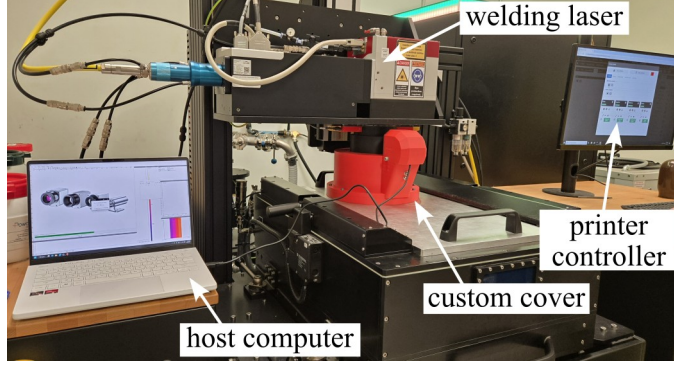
Custom cover equipped with a thermal camera, host computer, and welding equipment.
